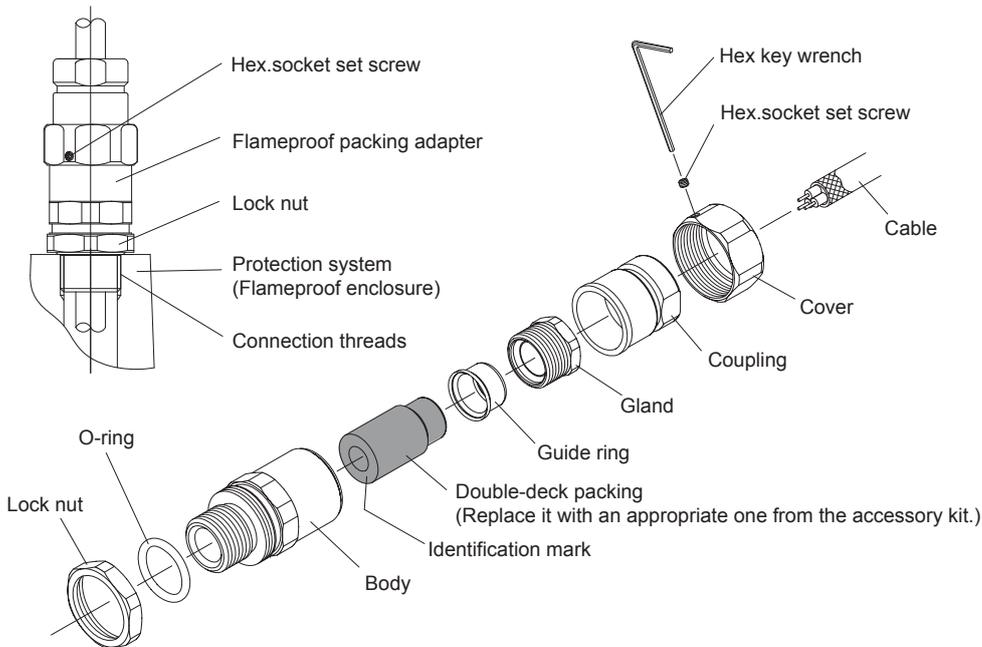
Procedure for mounting a cable packing adapter for a protection system
